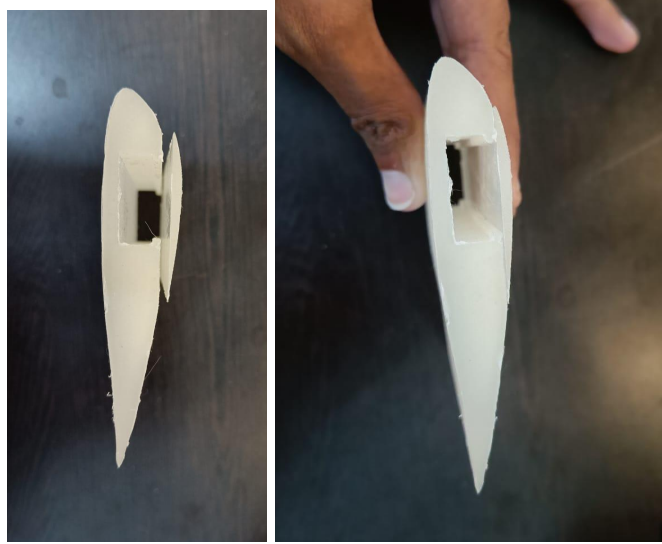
and 12: The printed wing parts from 0.2mm nozzle printer
